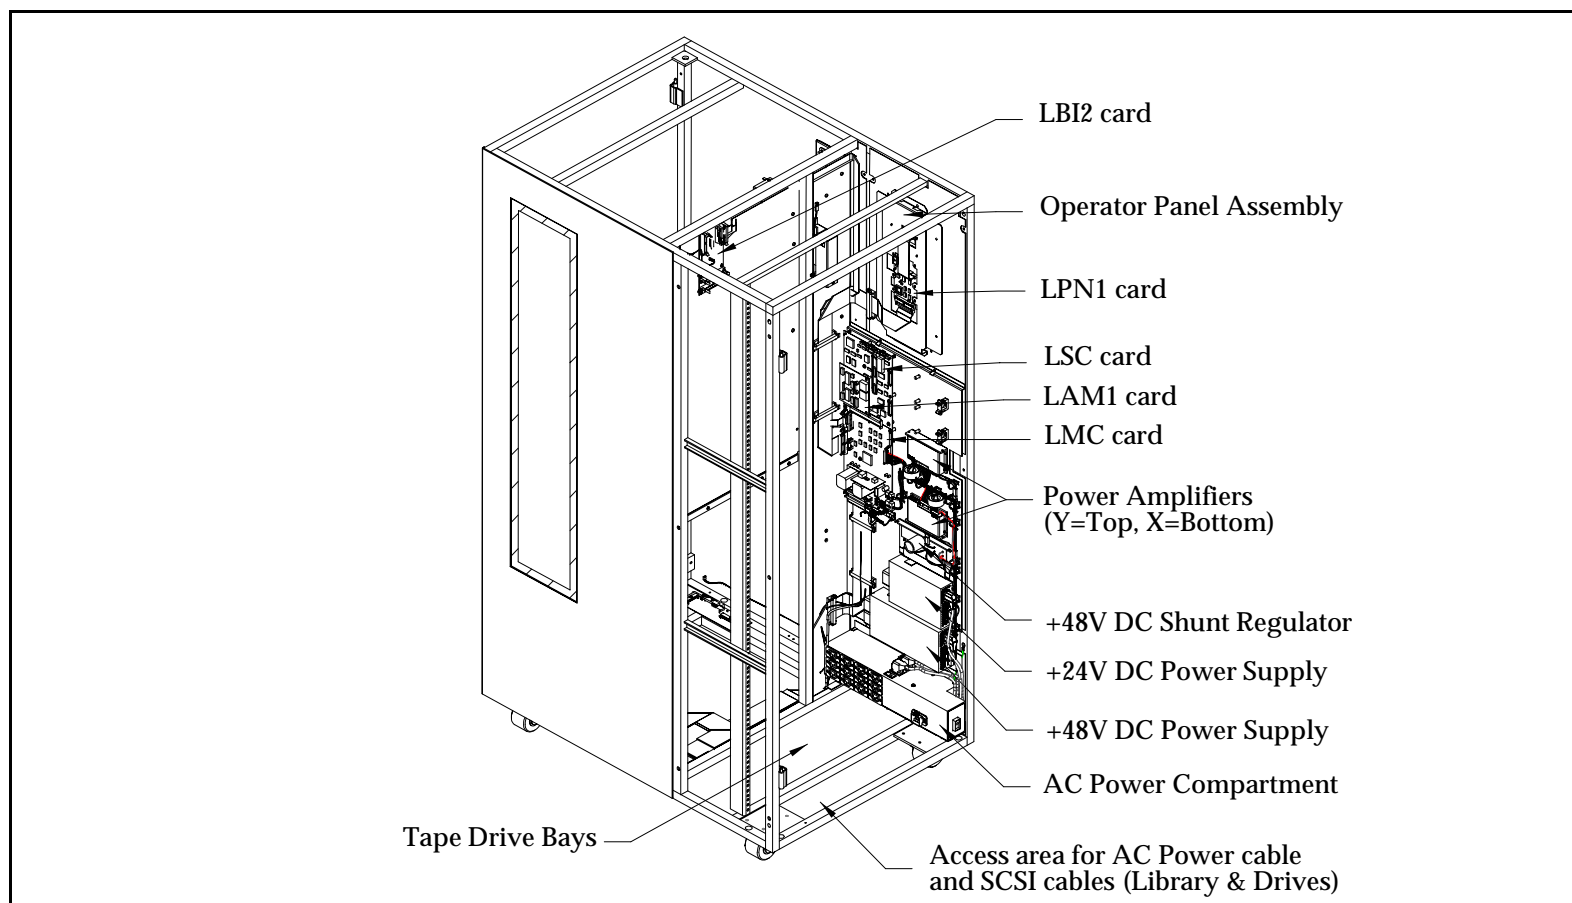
Front View of Control Module Model C20 & C30 (some parts and assemblies are not shown for clarity)
